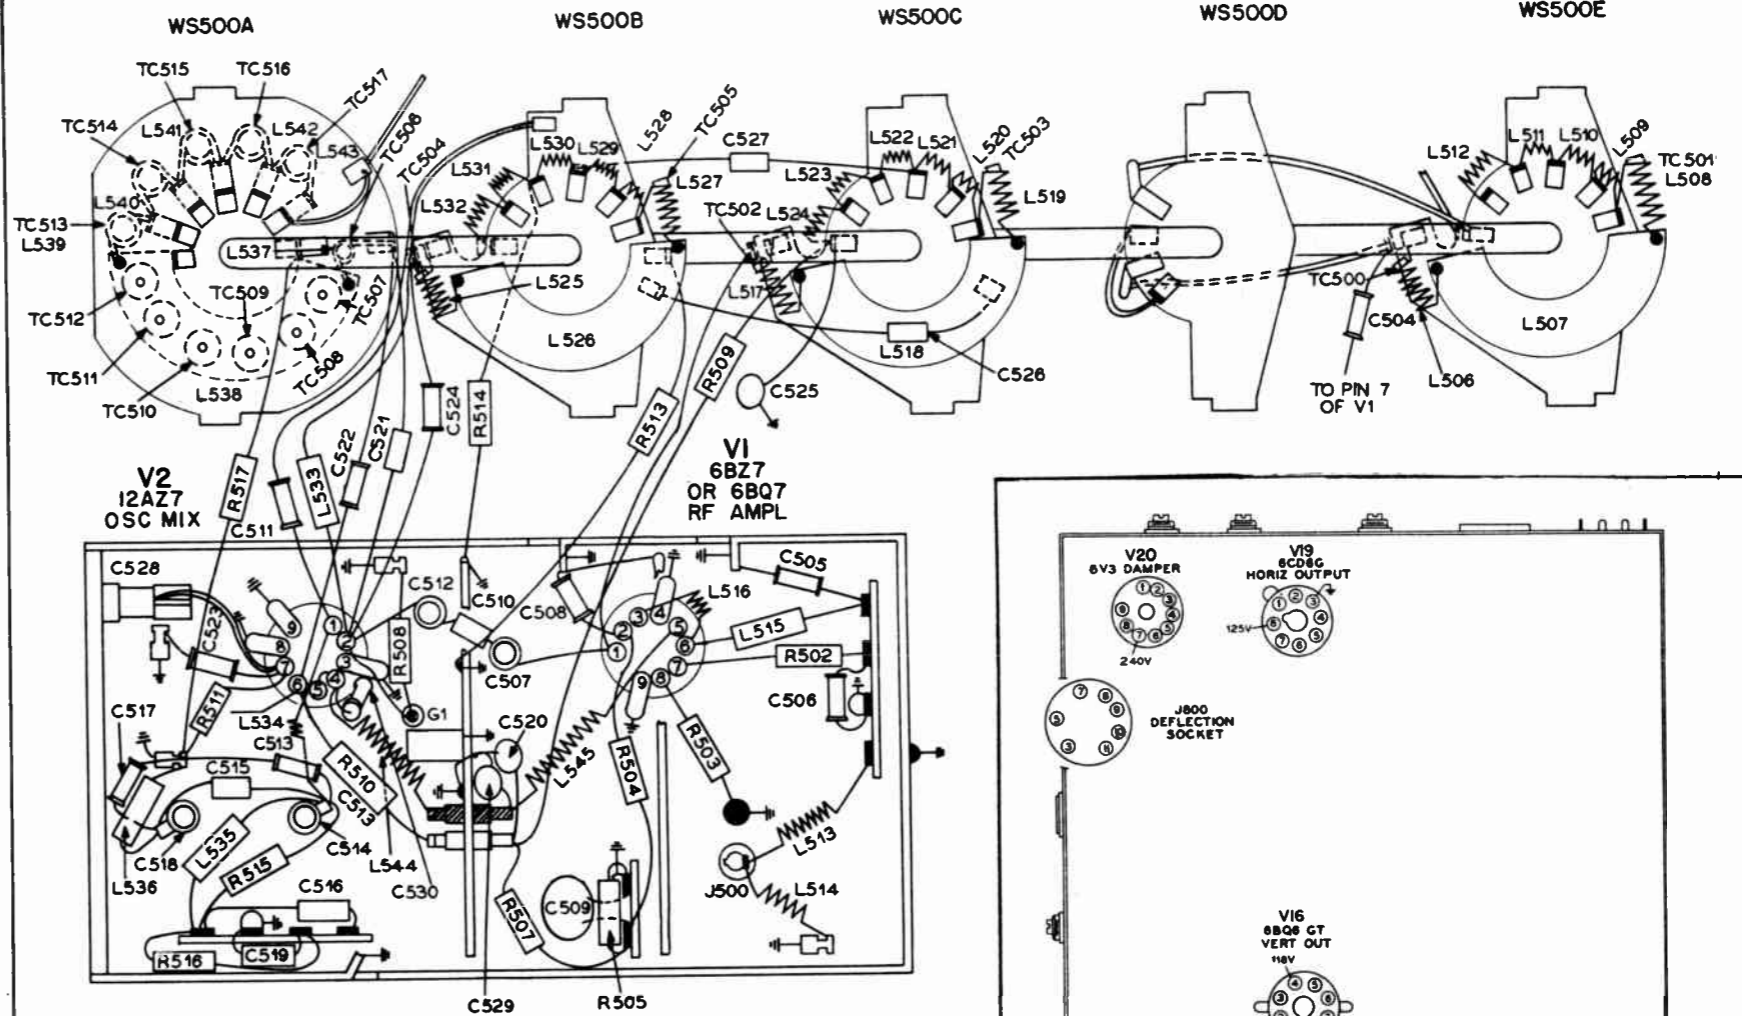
Television Tuner, Part No. 76-7600, Base Layout
